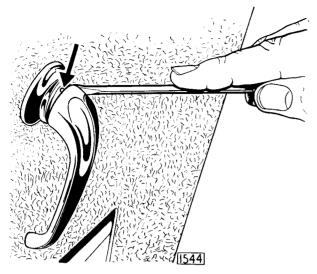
Showing the location of the interior door lock handle retaining pin.
